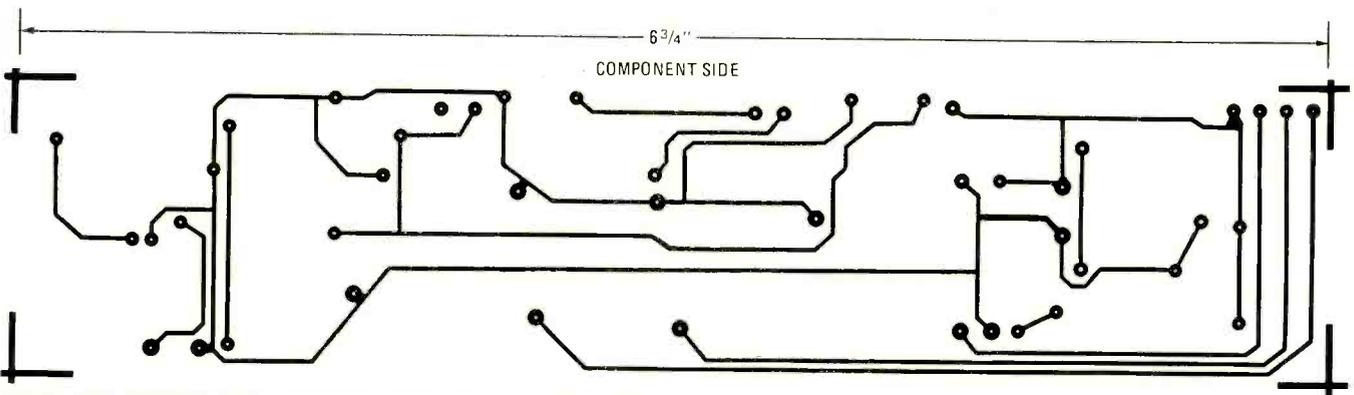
FOIL PATTERN for the component (front) side of the display PC board.
